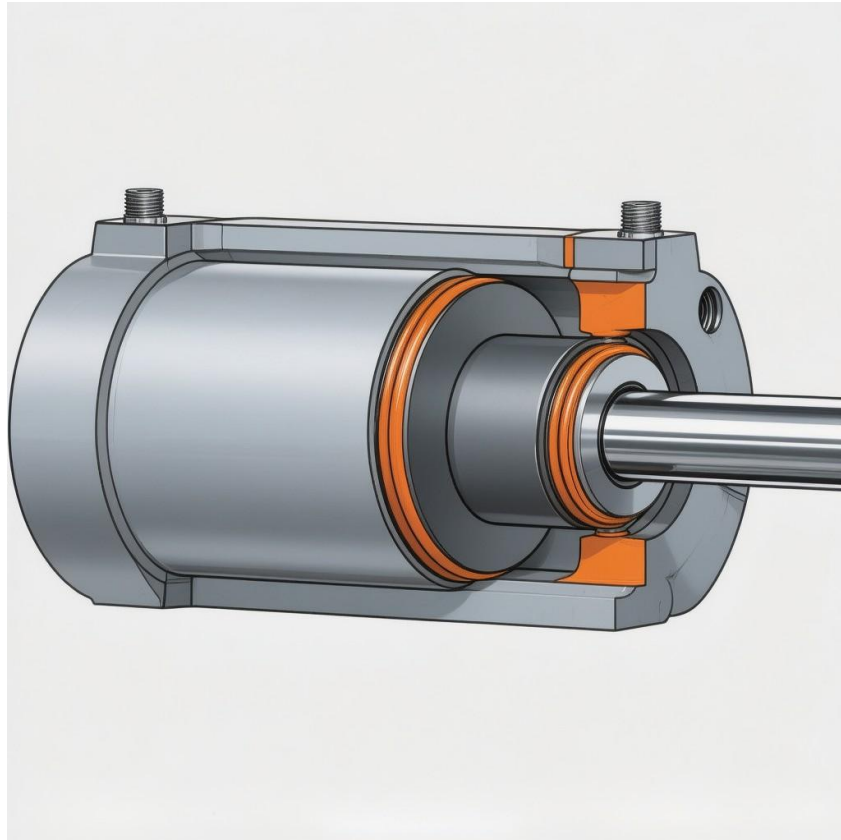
Cross-section of a double-acting cylinder showing key wear parts.
